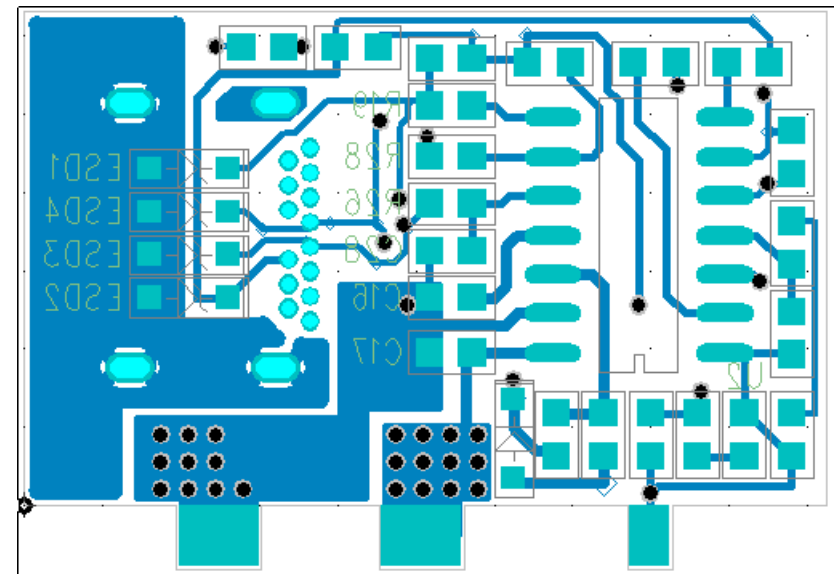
, Bottom View of PD control board (WT6632F)'s PCB
